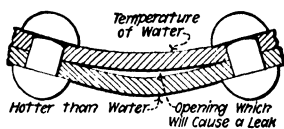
Leakage in fire seam when pitch of rivets is too large and allows bulging.
